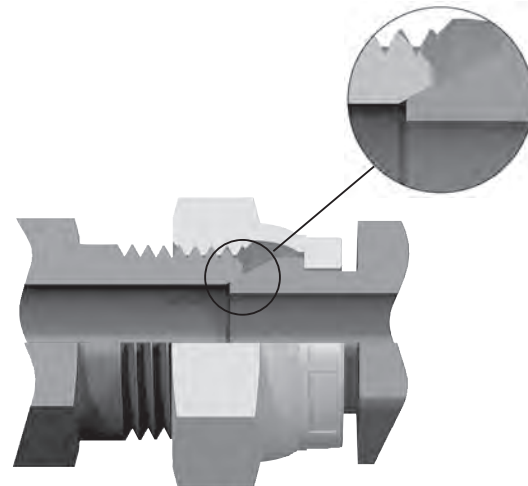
Illustration showing how NPSM swivel adapters seal on mating chamfer in male pipe thread
